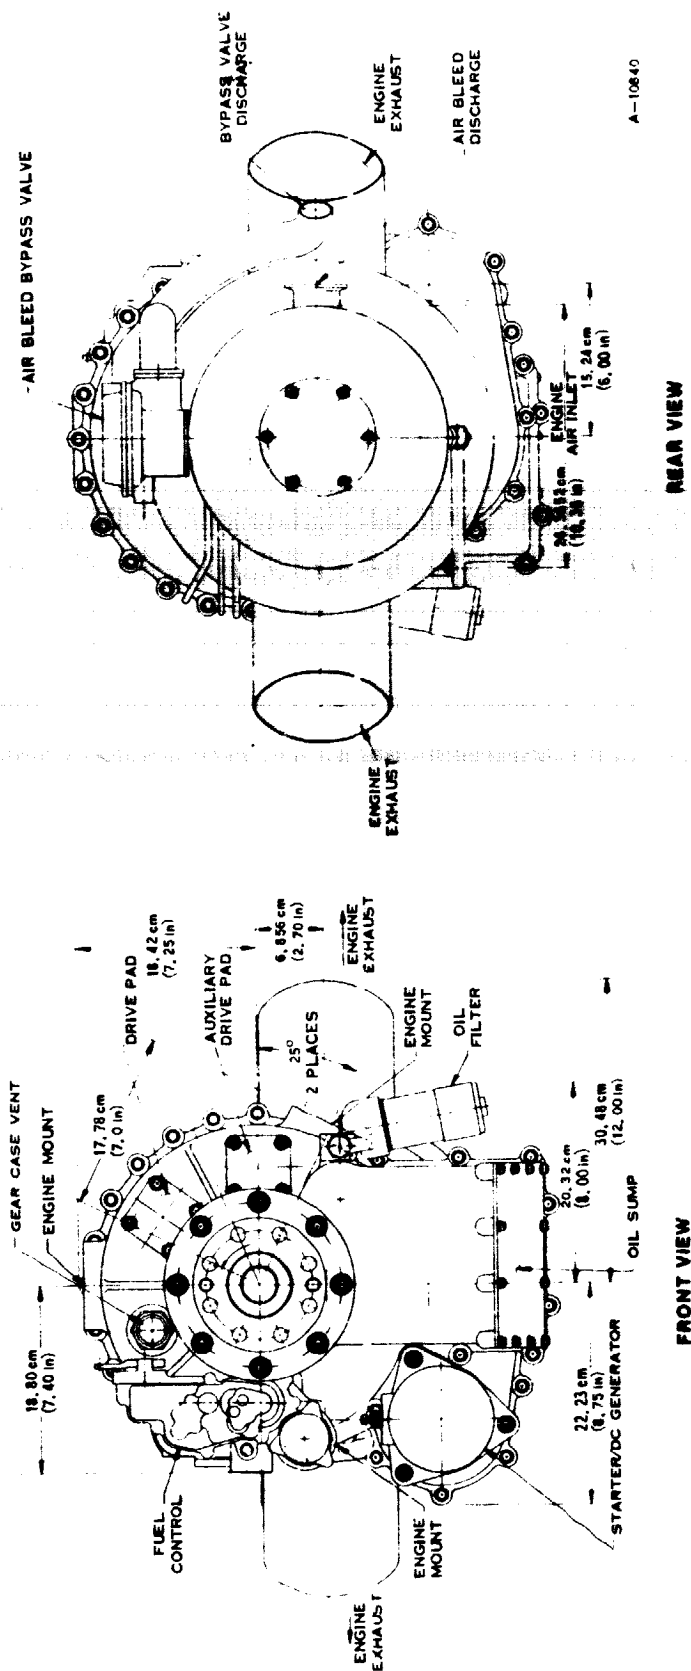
Fixed Shaft Turboprop Installation Drawing (Sheet 1 of 2)
